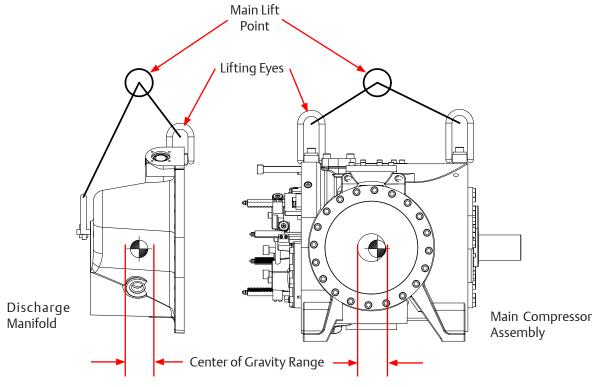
Bare Shaft Compressor Center of Gravity - Discharge Manifold and Main Compressor Assembly (Models 291-2101)
